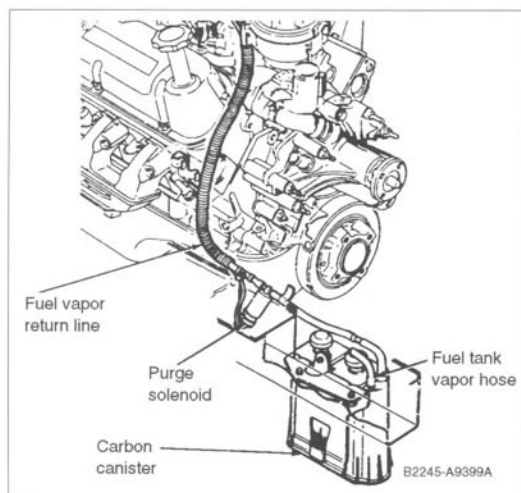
Canister Purge Solenoid Valve opens on signal from control module, passing fuel vapors from carbon canister into intake manifold.
